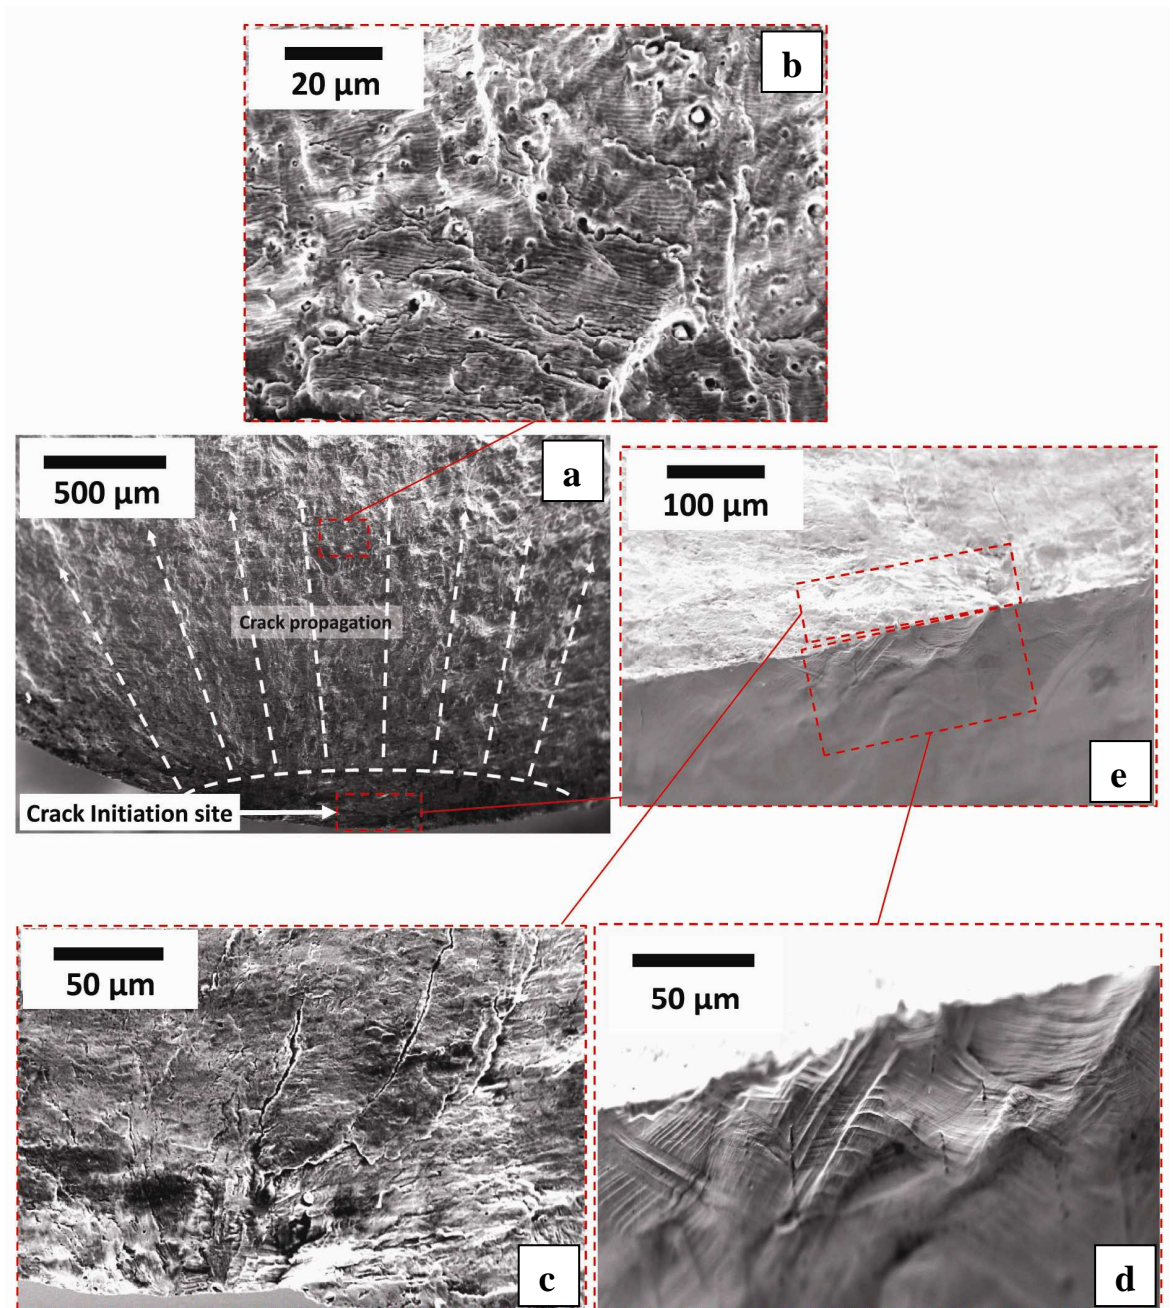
22: a) Fracture surfaces of AISI 304L, Electropolished (3) and fatigue tested at 336 MP.; b) Striations; c) Crack origin from the top; d) Lateral view of crack origin; e) Crack origin zone.
